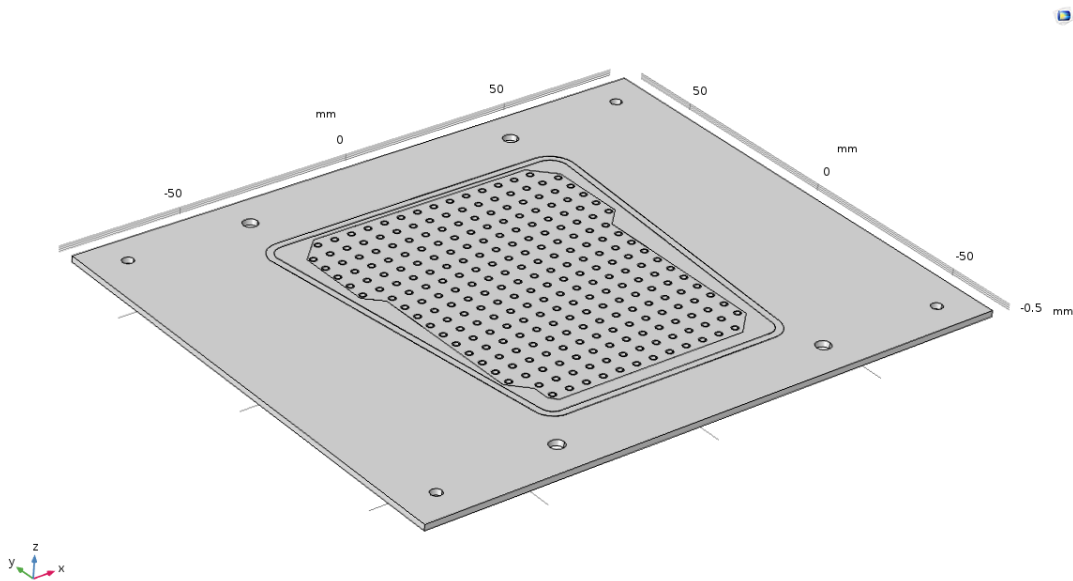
Geometry of the test frame after all the details were removed and the vacuum seal was added as seen from the COMSOL Multiphysics™ GUI.
